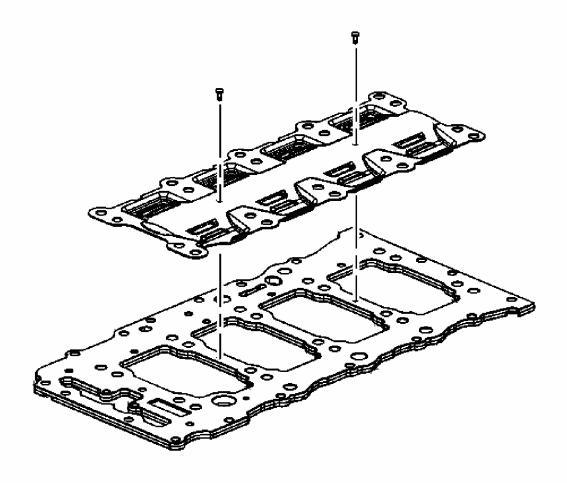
View Of Oil Scraper Plate & Oil Manifold Plate Courtesy of GENERAL MOTORS CORP.
